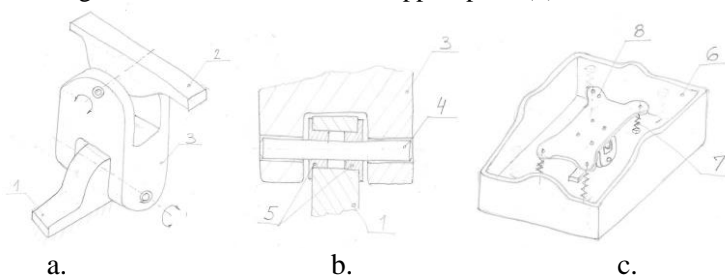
Seating mechanism concept: a. sketch of the joint with dual rotation; b. sketch of the joint details; c. sketch of the mechanism housing
